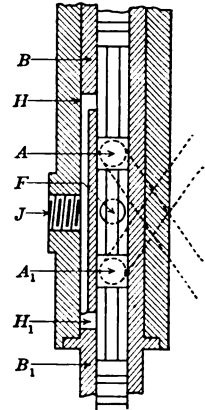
PILOT VALVE. DETAIL ENLARGEMENT FROM FIG. 281
